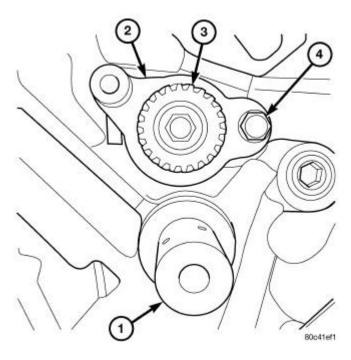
BALANCE SHAFT RETAINING BOLT Courtesy of CHRYSLER LLC
